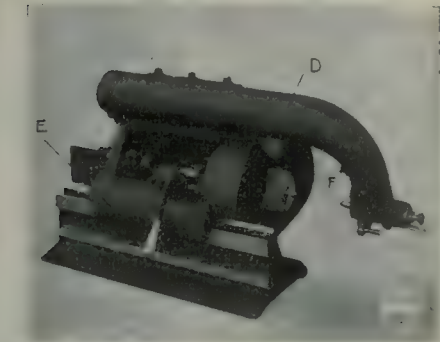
FRONT VIEW NO. 2. LOOSE CAM ATTACHMENT.
